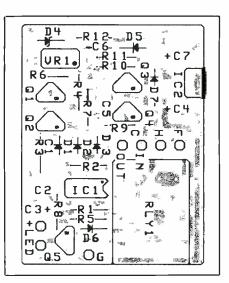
Wiring guide for pc board. Use this as a rough layout guide if you use perforated-board construction.
